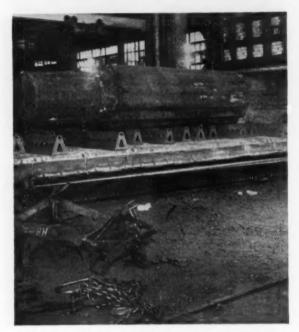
A 30-ton ingot mounted on a car bottom about to enter one of the forging heating furnaces.
